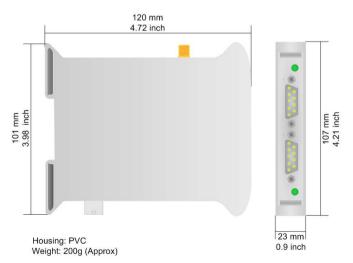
Mechanical dimensions scheme for HD67300-011-A4, HD67300-021-A4
